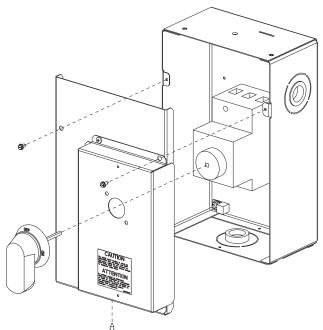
Handle and Shaft Assembly for HACR Circuit Breaker
